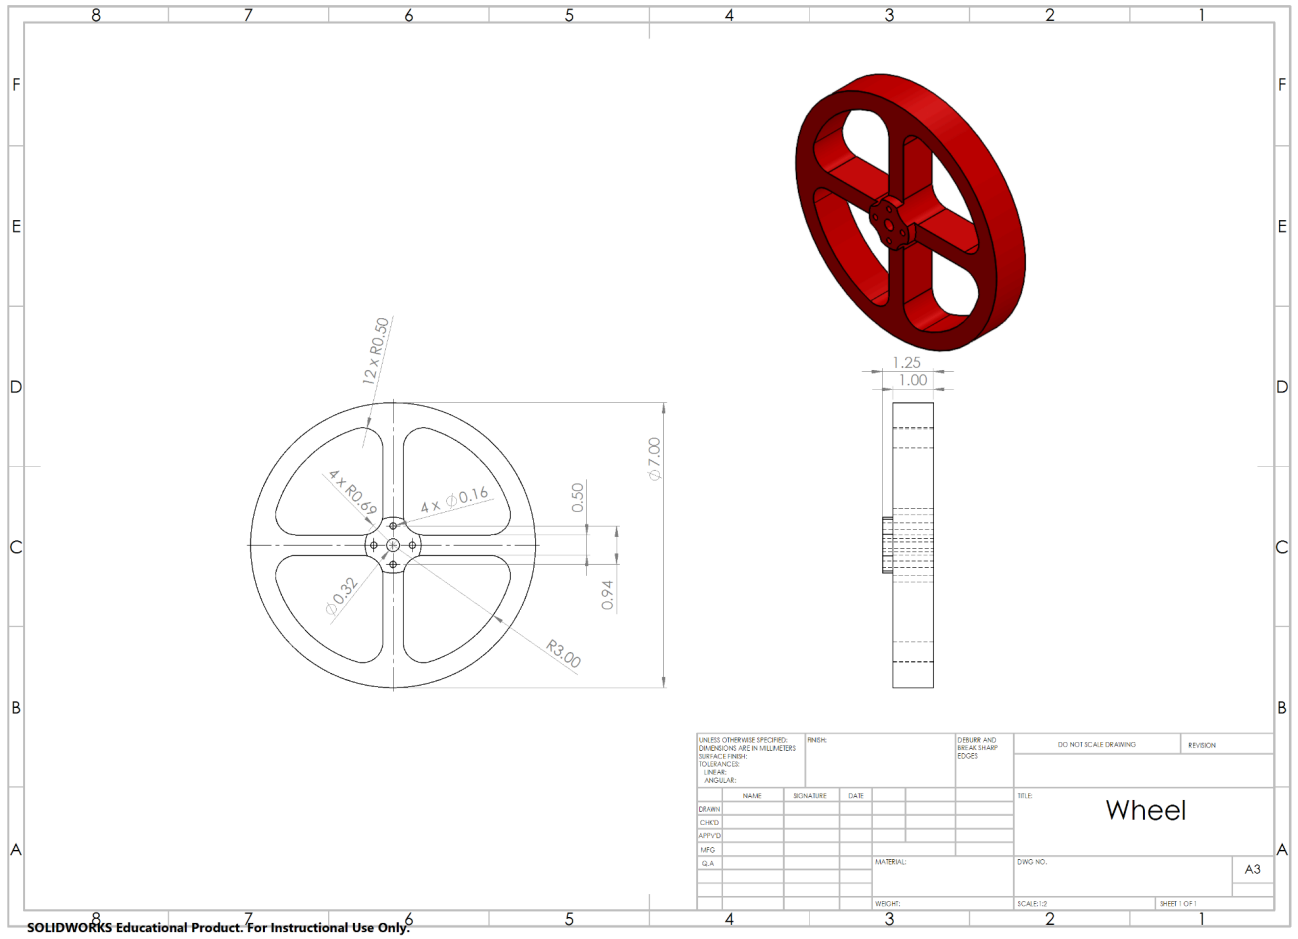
SolidWorks Drawing of Wheel (3D Printed)
